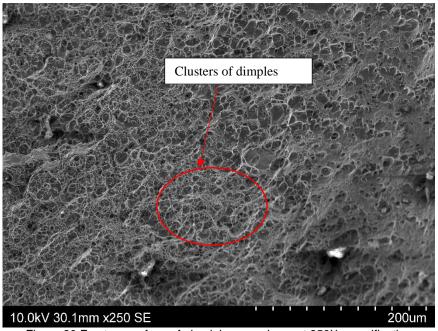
Fracture surface of aluminium specimen at 250X magnification
